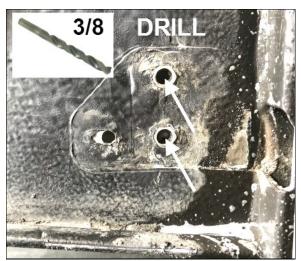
HINGE PART TO BE REMOVED (COMPRESSOR DOOR)
